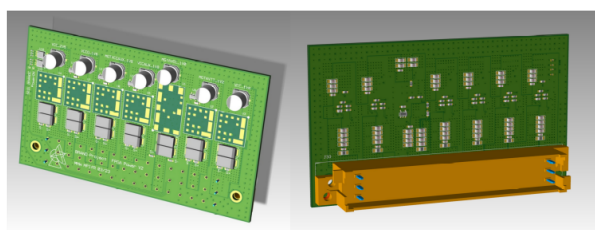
The design view of the power supply daughter boards (top and bottom view).
